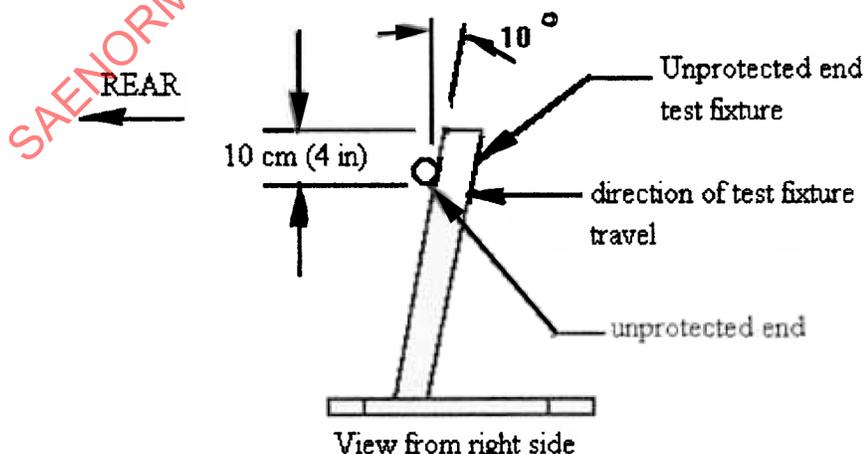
TEST FIXTURE ORIENTATION—UNPROTECTED END TEST
